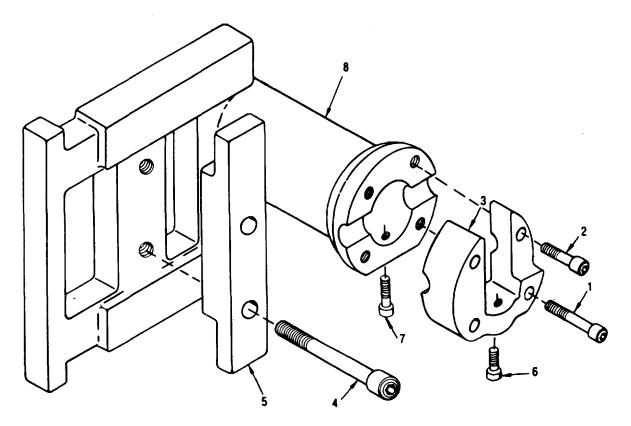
Telescope support assembly for M117 telescopes - exploded view
